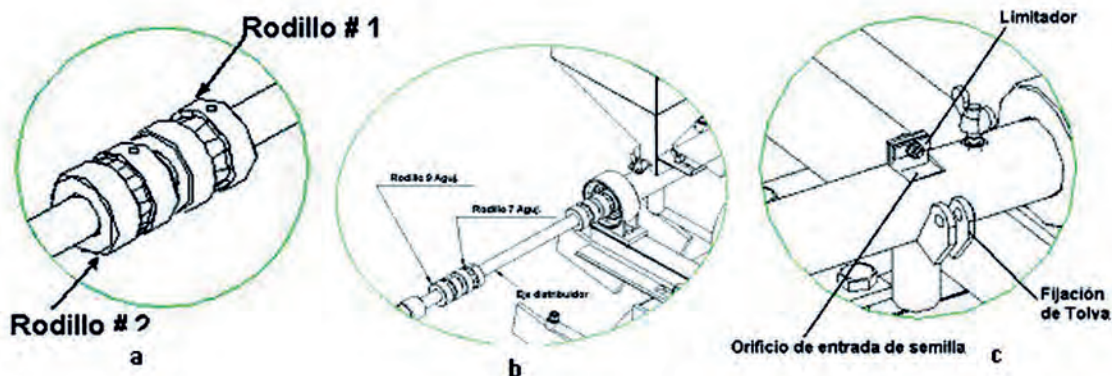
Location detail of the distributor rollers on the distributor shaft
